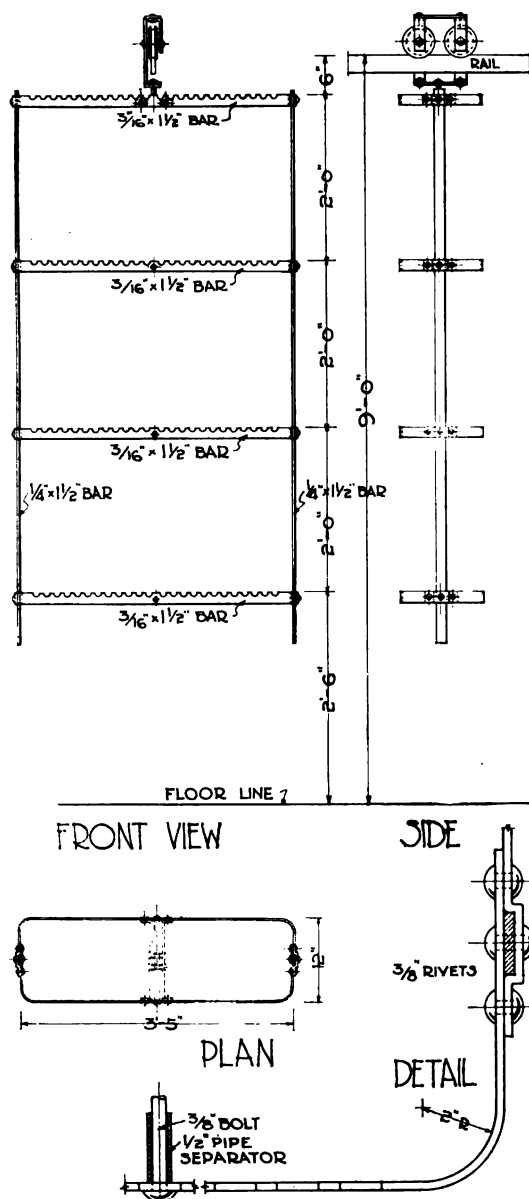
DETAILS OF SMOKE HOUSE TROLLEY.
